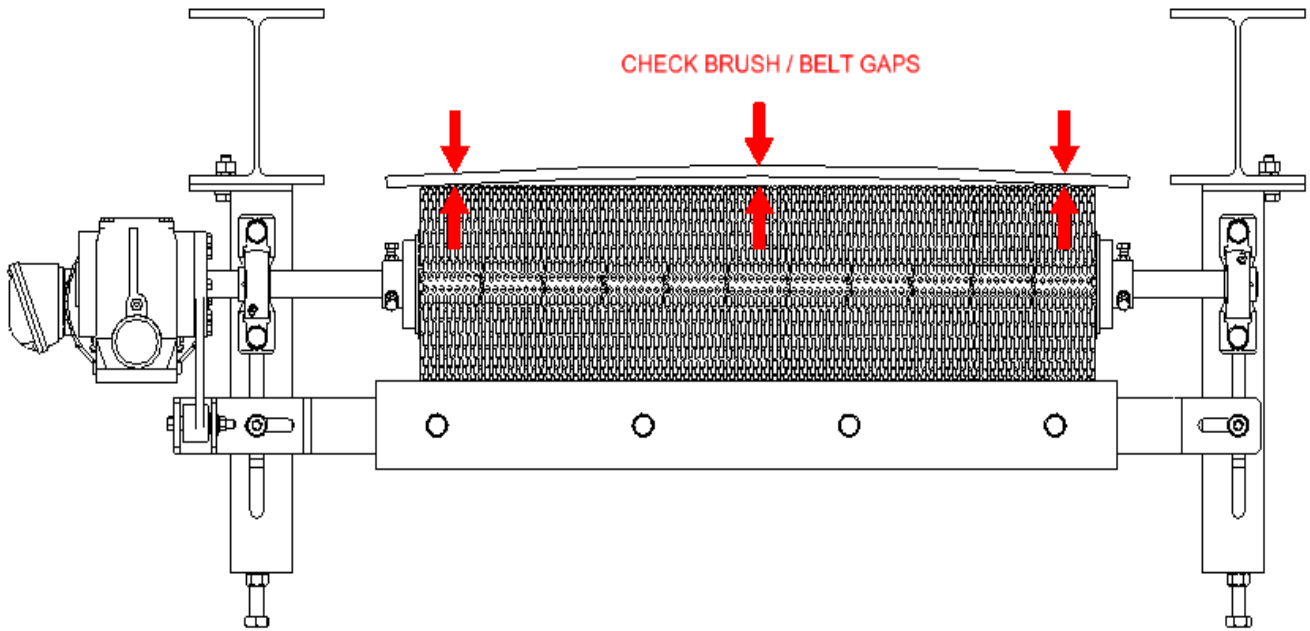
illustrates the brush position relative to the belt face. For best performance the brush should contact the entire face of belt.
